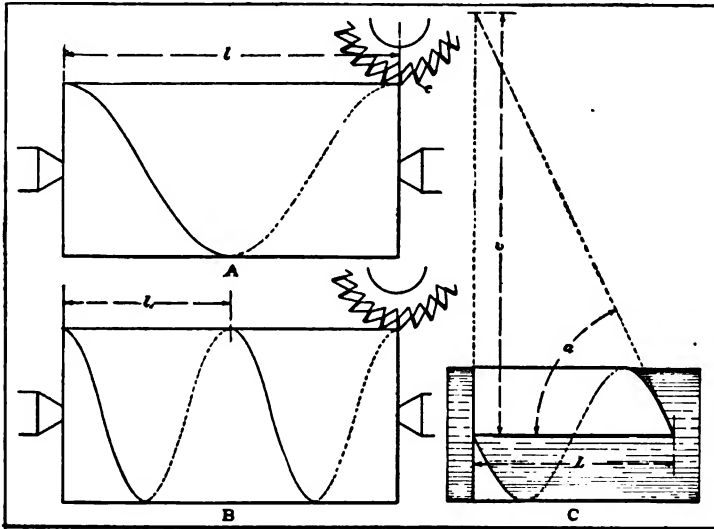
Diagrams illustrating the Principle of Helical or Spiral Milling
